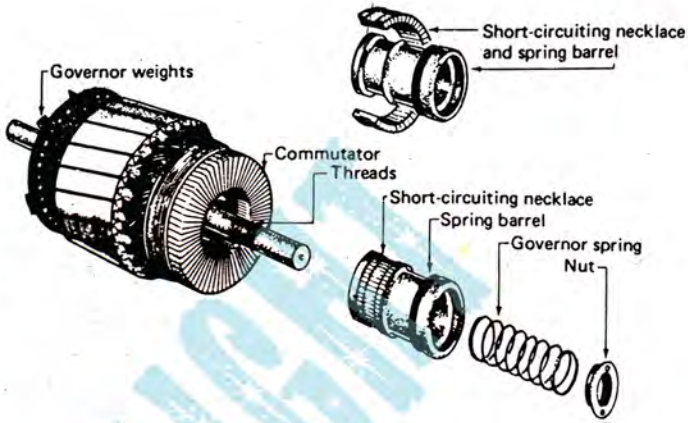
An exploded view of the rotor of a repulsion-start, induction-run motor. In this type, the brush holder is located in the end plate.
